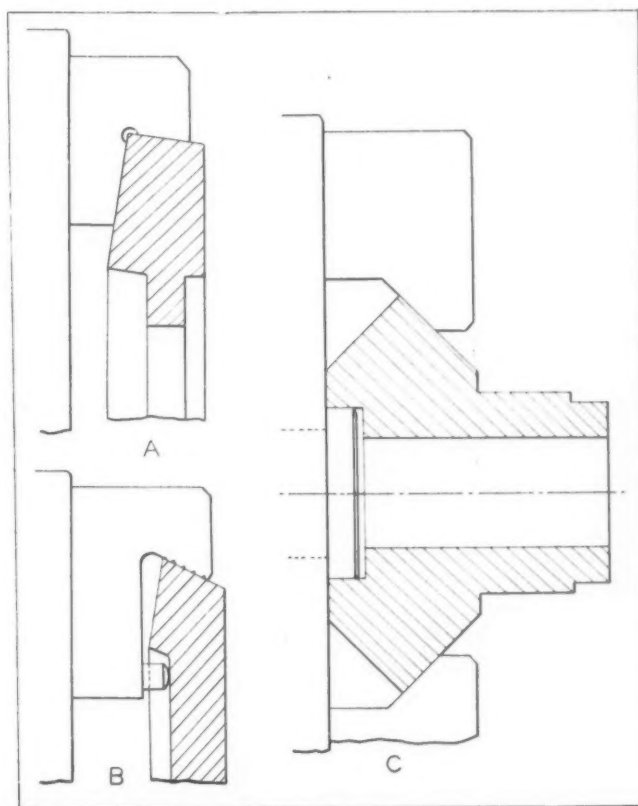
Chuck Jaws Machined to Fit Bevel Gear Blanks
